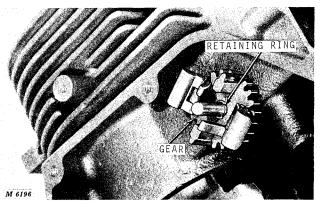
Removing Retaining Ring and Governor Gear Assembly
